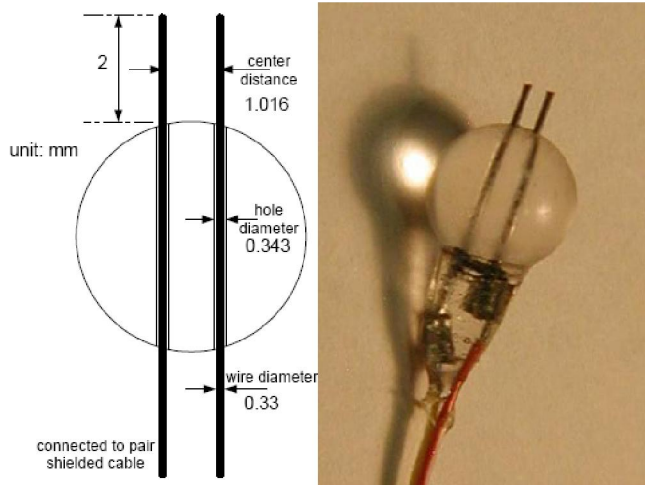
Dimensions of parallel wire film thickness probe and picture of probe installed on an acrylic bead.
